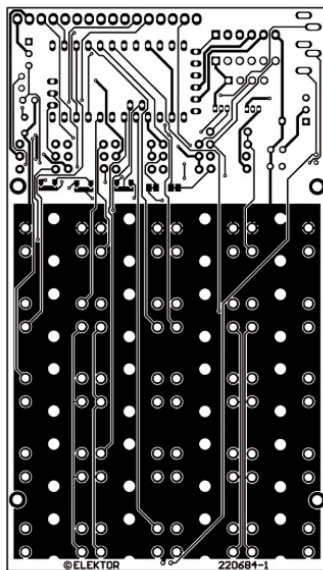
MultiCalculator PCB copper top (PCB 220684-1 v1.0).
